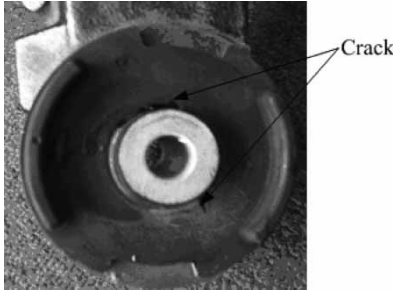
Photo of the rubber mount after fatigue crack.
